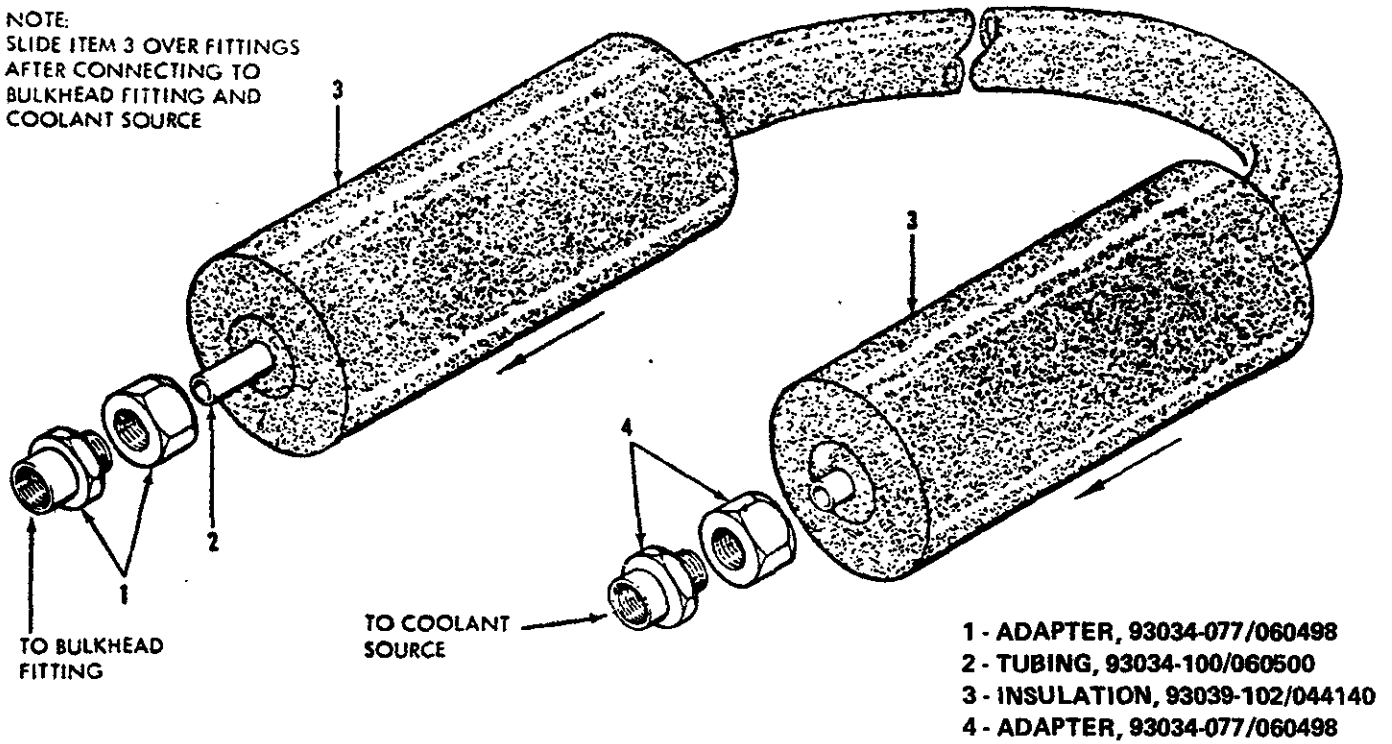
Typical Installation (Removal) of Coolant Hose to (from) Bulkhead Fitting
